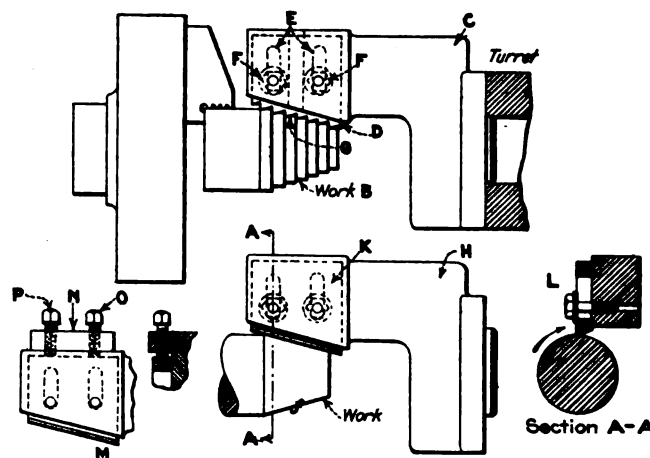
TAPER-FORMING TOOLS ON TURRET
